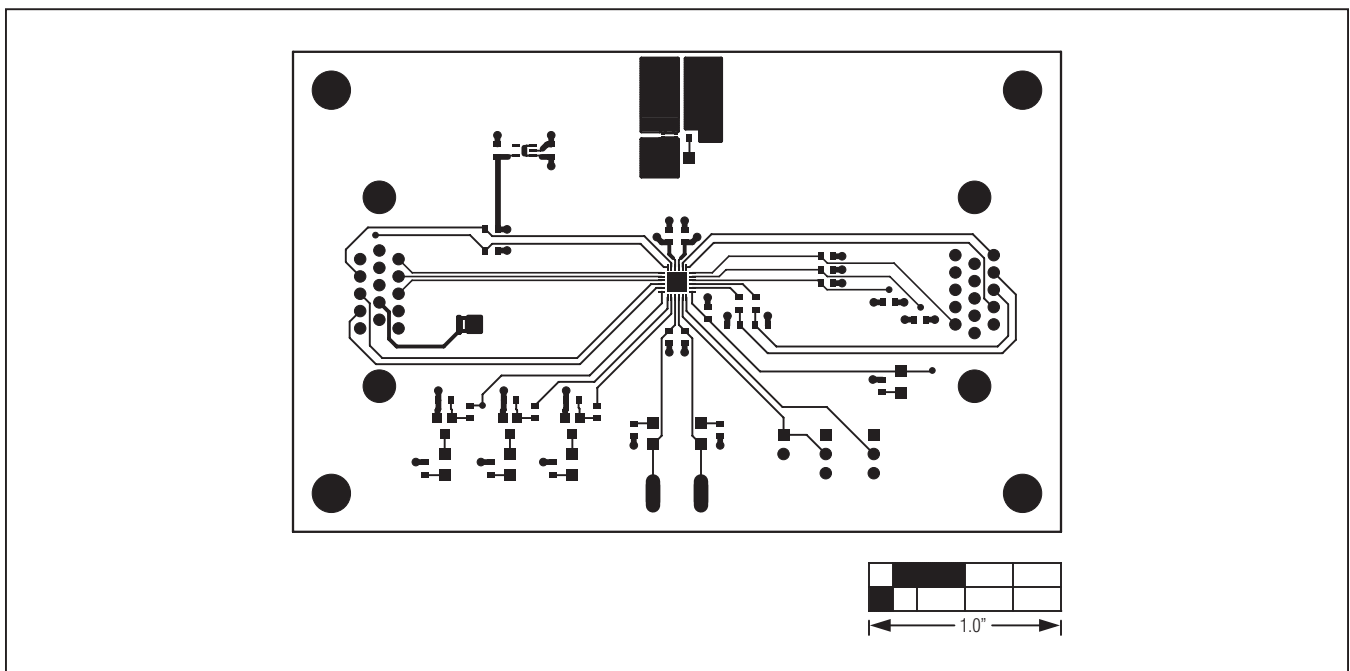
MAX14984 EV Kit PCB Layout—Component Side
